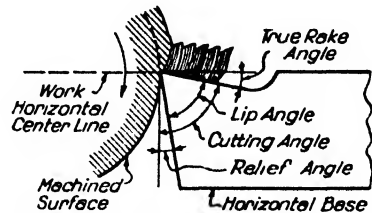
A section through the active cutting edge A-A of Fig. 9 showing true nomenclature.
